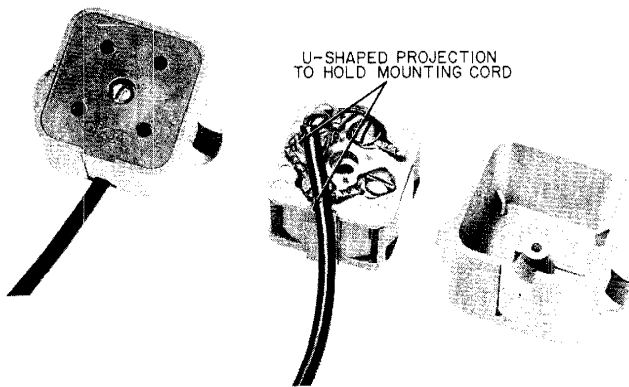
423A Plug, Front View and Rear View Cover Removed
